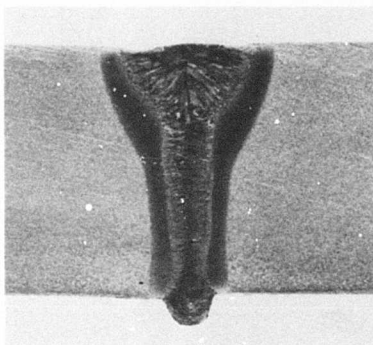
WELD CROSS SECTIONS (LOW ALLOY CARBON STEEL
